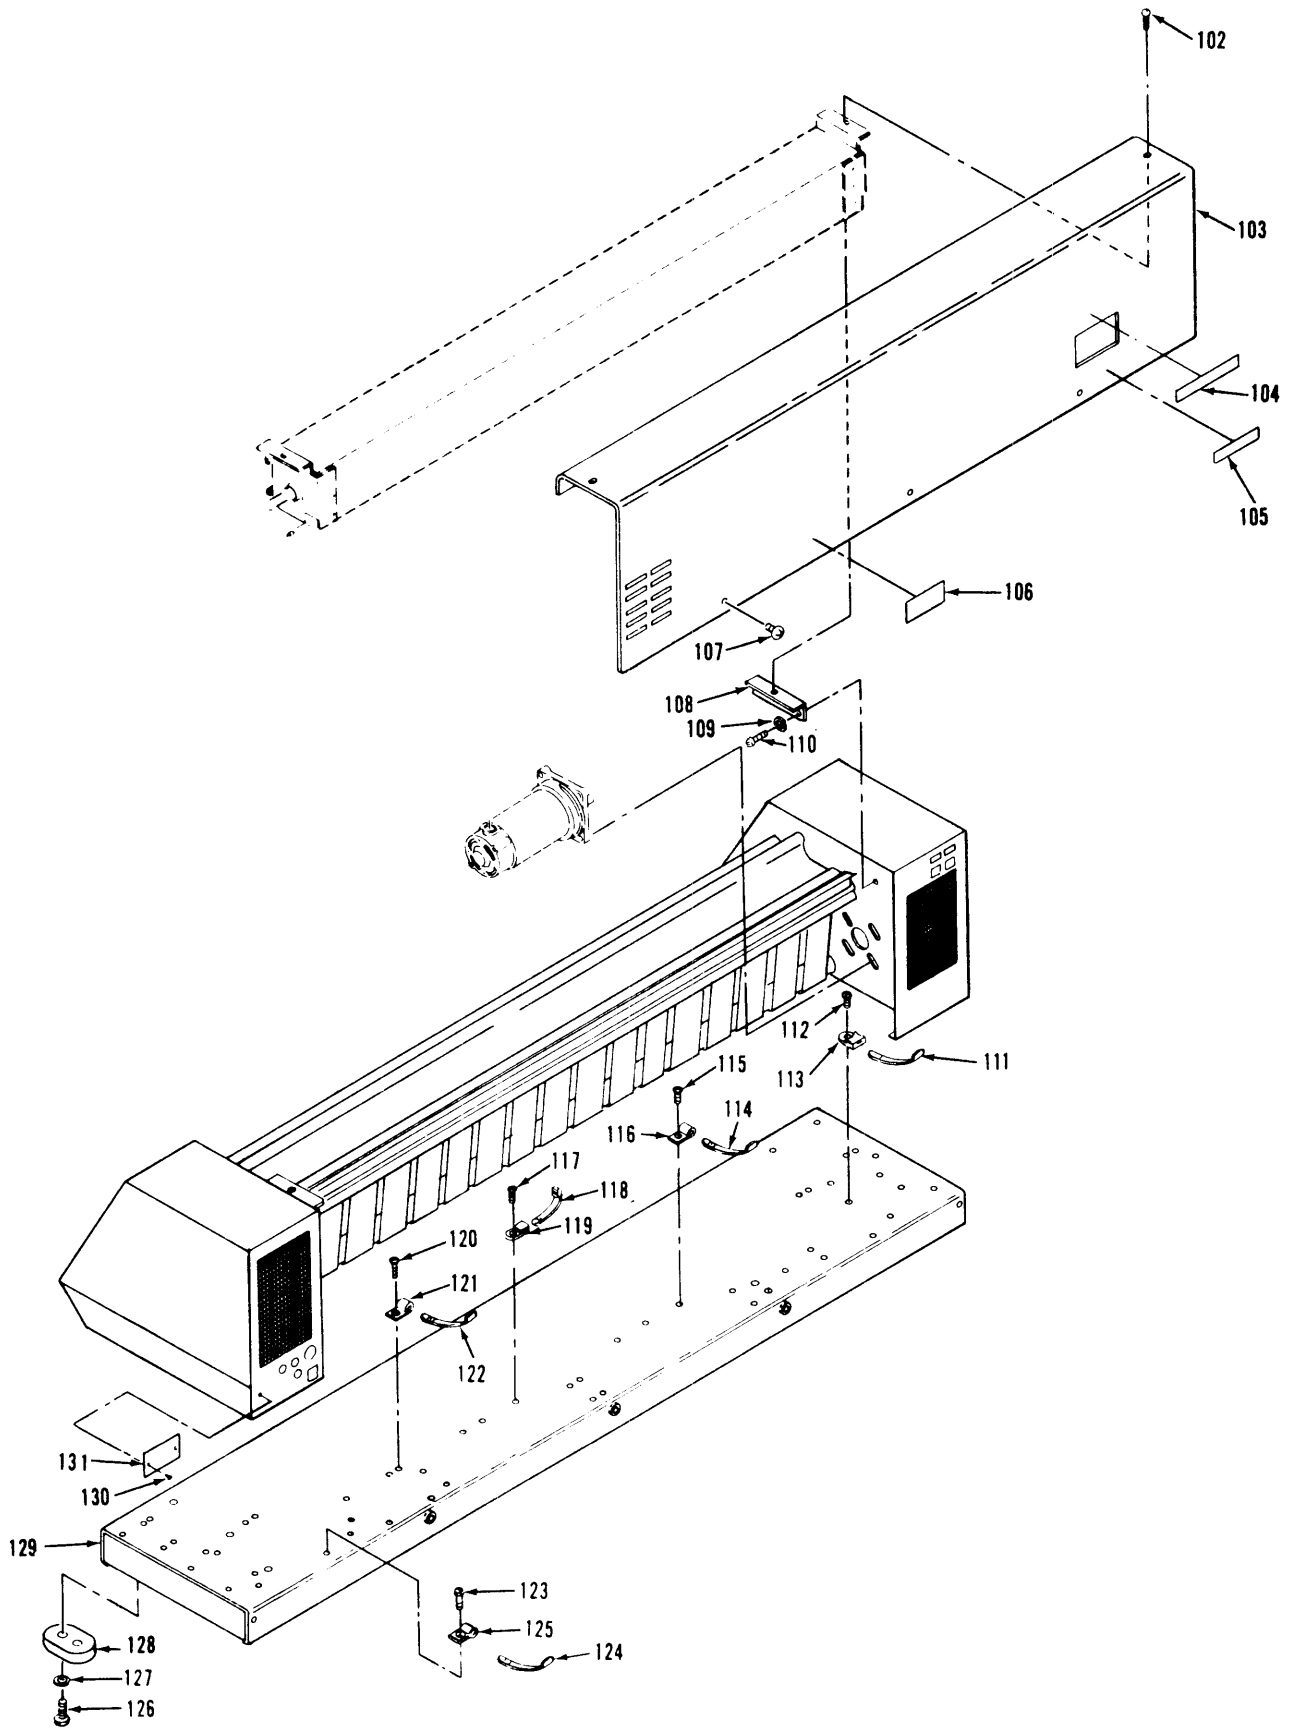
Machine Cabinet Group (Sheet 4 of 4)
